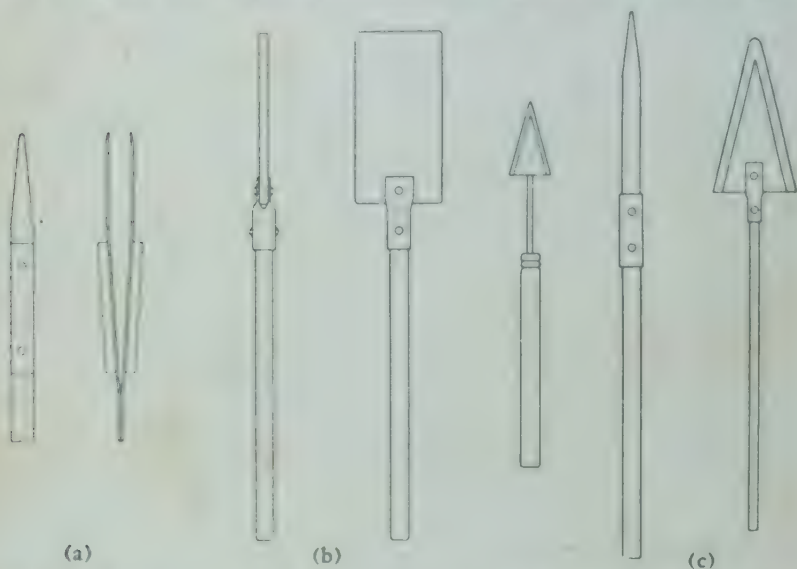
Glass working tools; (a) forceps, (b) shaping tools, (c) flaring tools
